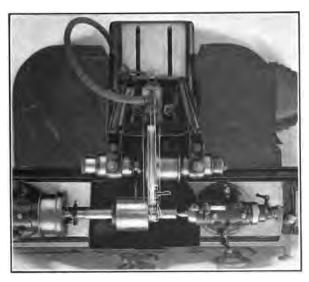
Shows a method of squaring the ends of bushings. The wheel should be very soft and relieved on the side, leaving a narrow cutting edge. If the axis of the arbor and the axis of the wheel spindle are exactly parallel the surface will be perfectly flat and at right angles with the axis. A convex or concave surface can be obtained by varying the relation of the axes. A wheel similarly turned away on the sides is shown in Fig. 278. A diamond tool is used to turn the face or sides of an abrasive wheel.
